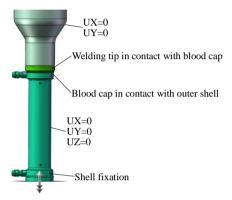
Loading conditions for ultrasonic welding of PP dialyzer.
